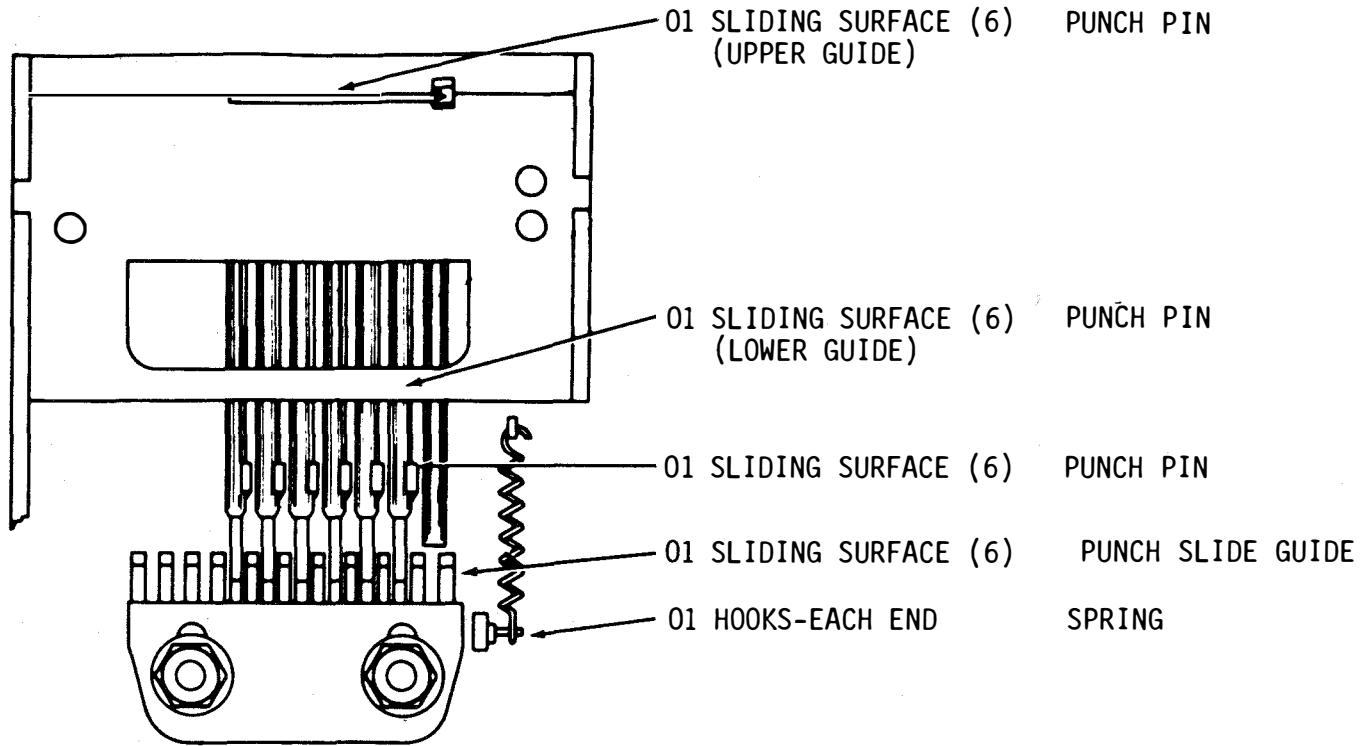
Sliding Surfaces, Feed Wheel and Components for Fully Perforated Tape
